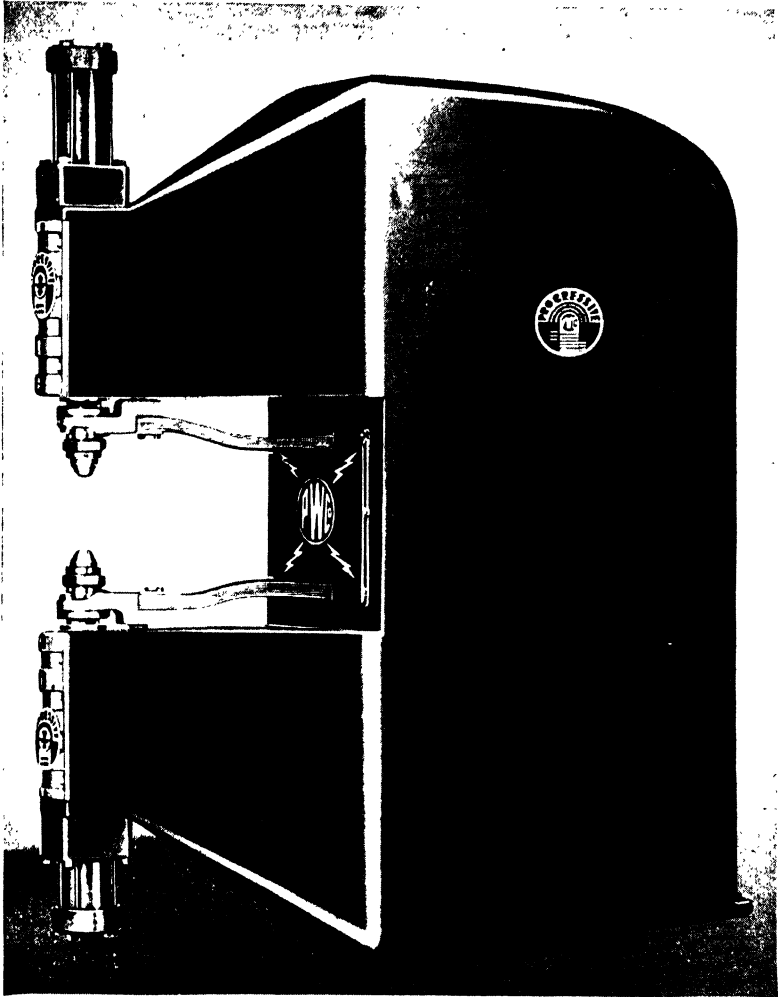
This machine “thinks for itself.” The new progressive Temp-A-Trol forge welder, which eliminates the effects of many of the variables that control weld quality, heat-treats and welds simultaneously and is automatically self-compensating.
